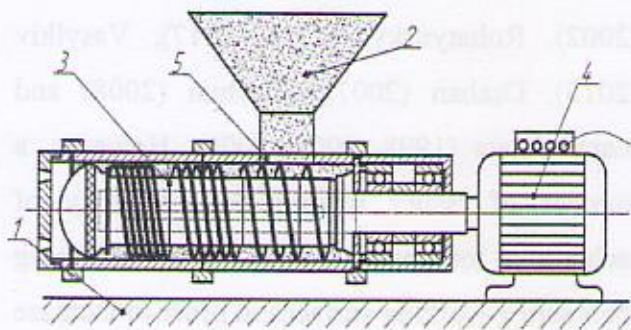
Constructive scheme of the extruder: 1 – table; 2 – bunker; 3, 5 – sections of screw extruder; 4 – engine
